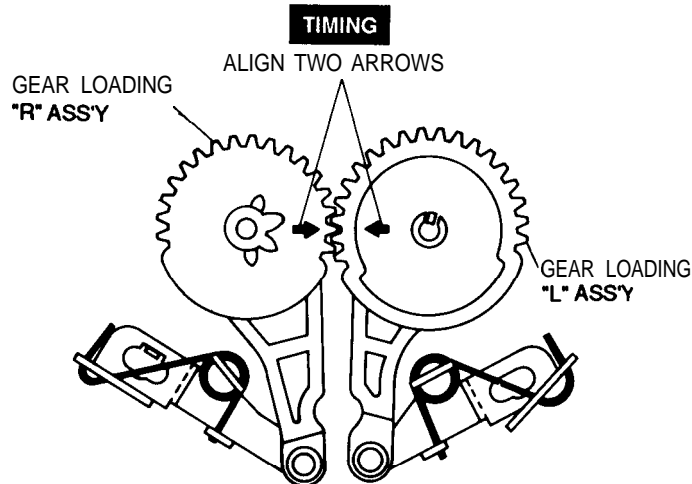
Assembly of Gear Loading "L", "R" Ass'y
